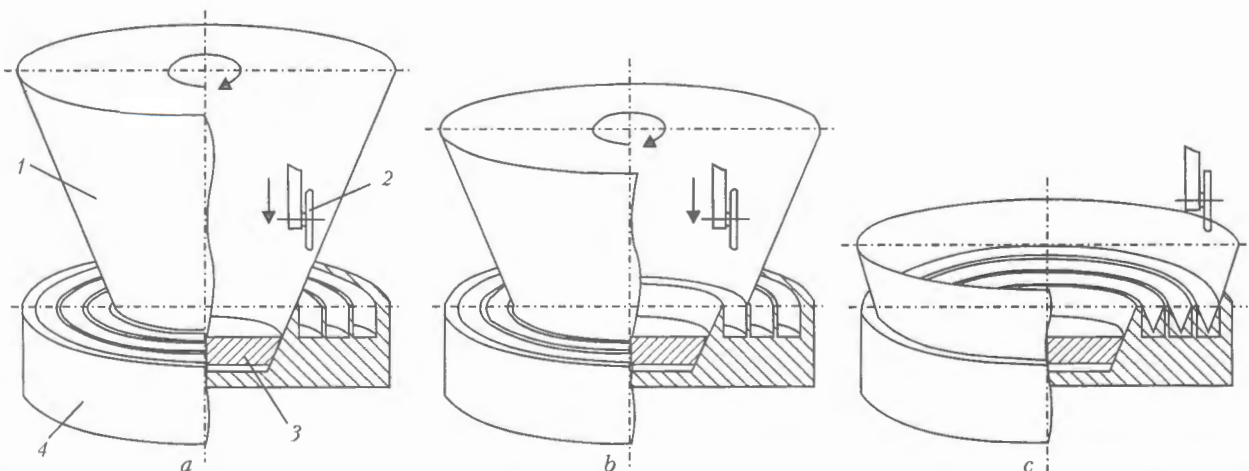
Schematic of transformation of a conical shell into a corrugated disc at the initial (a), intermediate (b) and final (c) stages: 1 — conical billet; 2 — forming roller; 3 — clamp for fastening the blank in the mould; 4 — mould-matrix
